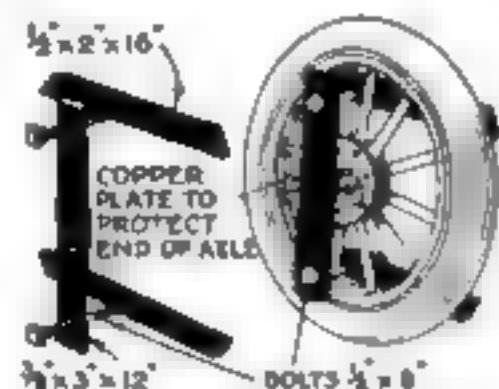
Wheel puller made of iron bars, a piece of copper plate and two heavy bolts
